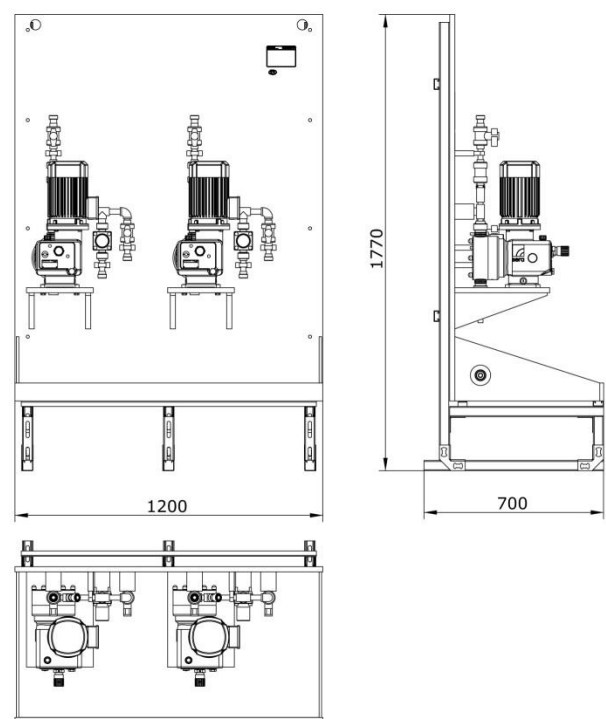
Dimensions of the CVD2 (floor mounting, steel stand)
